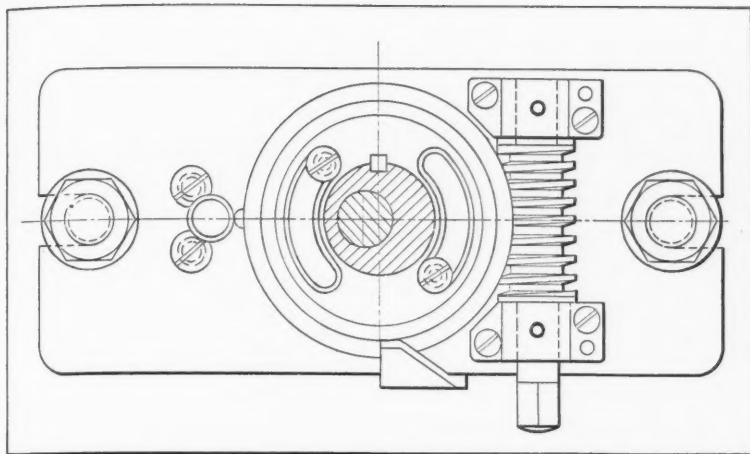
Plan View of the Recessing Tool, Showing How the Cutter Shaft is Fed toward the Work by an Eccentric Sleeve
